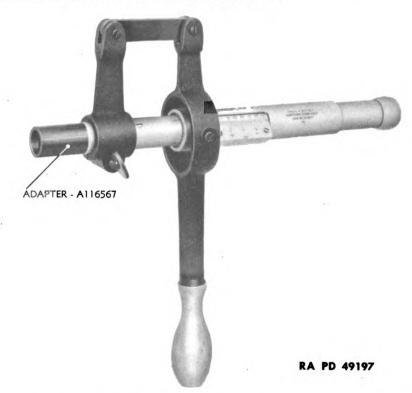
Handle, with Slide, Assembly (0.75-inch Star Gage)
